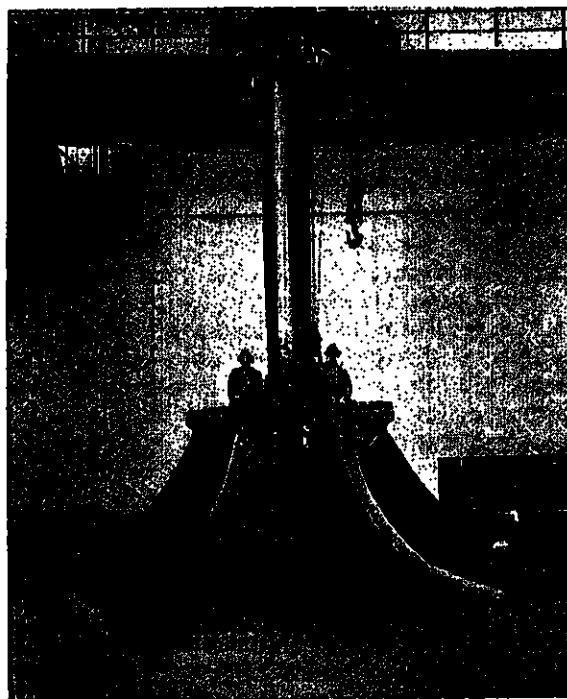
Runner of Lawaczeck turbine with fixed blades.
